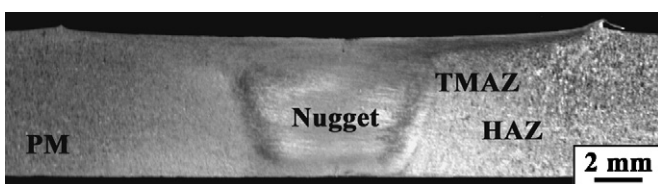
Cross-sectional macrograph of FSW Mg–Zn–Y–Zr joint (the advancing side is on the right).
